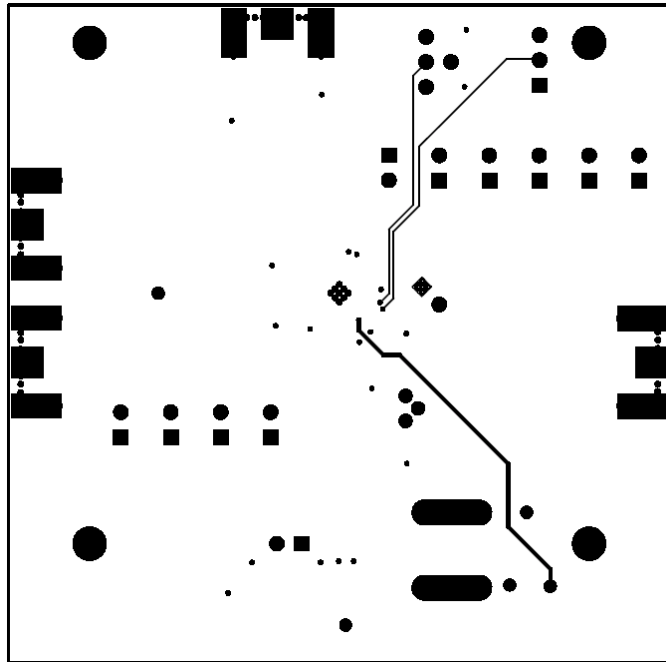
MAX3905 EV Kit PC Board Layout – Solder Side
